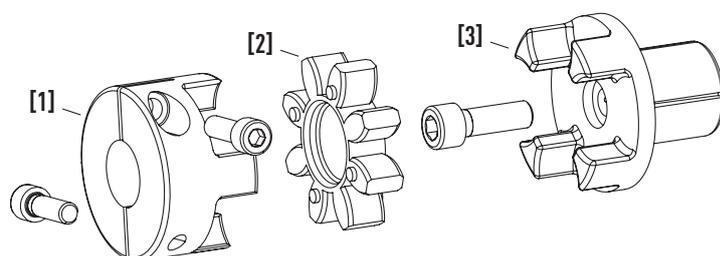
Coupling assembly variant 2: clamping hub with two clamping screws
